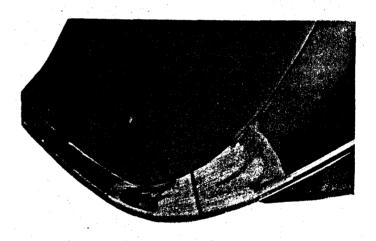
Illustration No. 20 Lower Rear Corner Weld (Regular Sedan).
